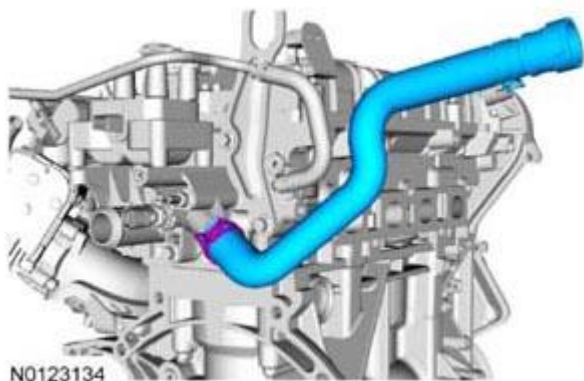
Identifying Coolant Hose And Coolant Outlet
